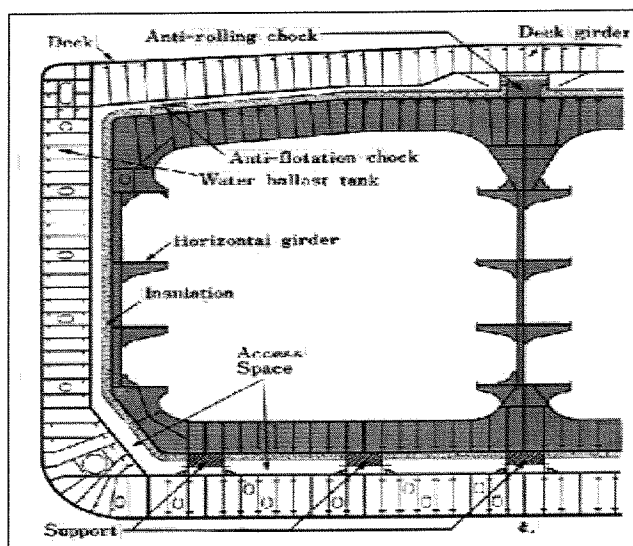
Cross section of SPB tank in LNGC (Ref 35)
